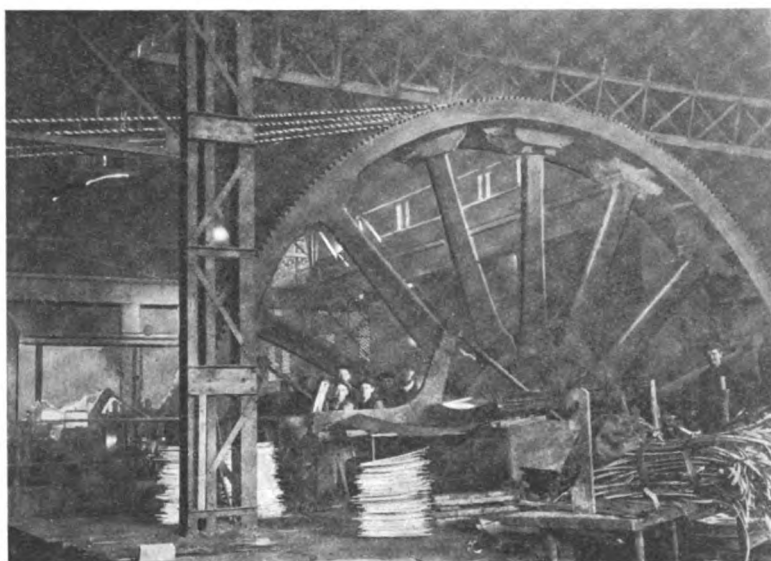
Mill sheave, 36 ft., diam., 150 tons, in hot roll drive.
